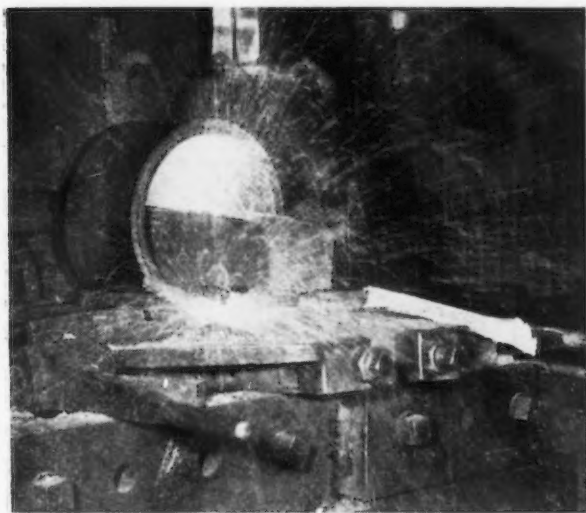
Actual flash weld in process. The process is characterized by a rapid and continuous discharge of sparks.
